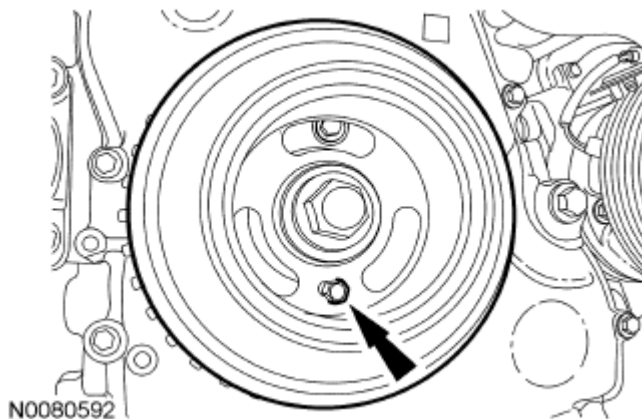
Locating Crankshaft Pulley Hole Bolt (6 mm x 18 mm)
